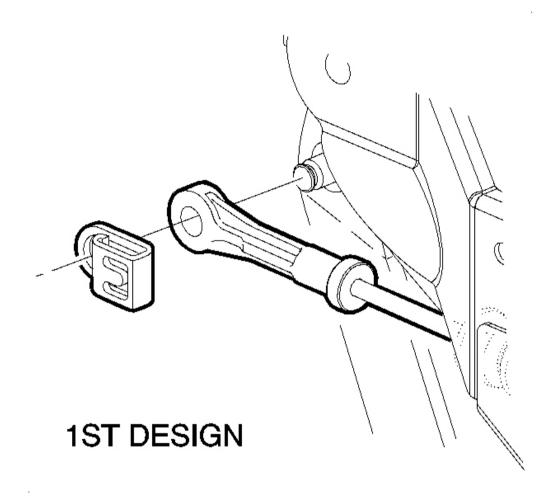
Pushrod & Clutch Pedal Courtesy of GENERAL MOTORS CORP.
